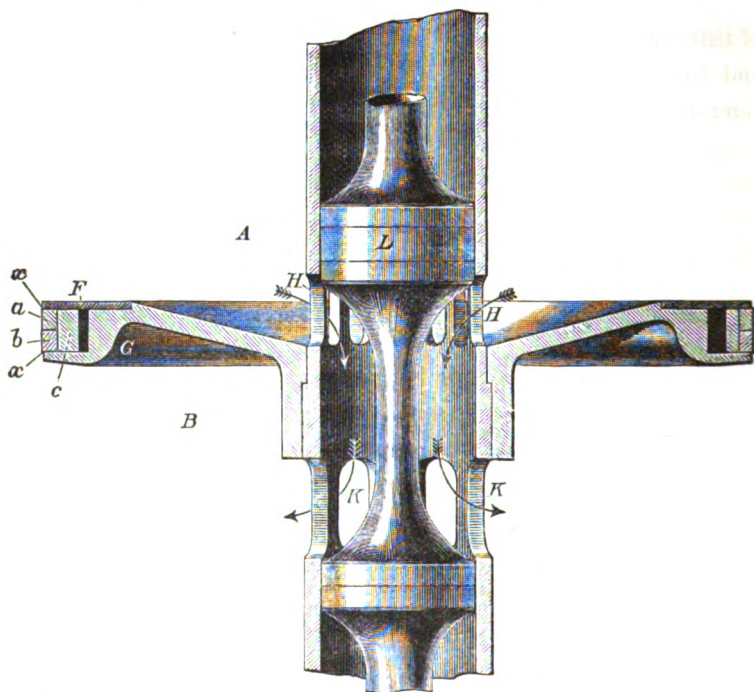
Vertical section through piston, showing rings *a* and *b*, which break joint; spring *c* for *lightly* forcing the rings outwards; spring follower plate *F*, with holes through it admitting steam to the space behind the spring *c*.
